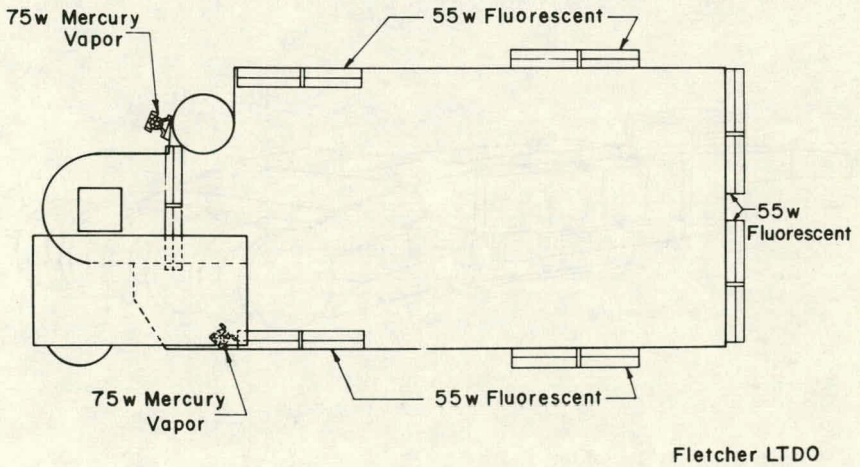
General layout of an illumination system for a Fletcher LTDO roof bolter.
